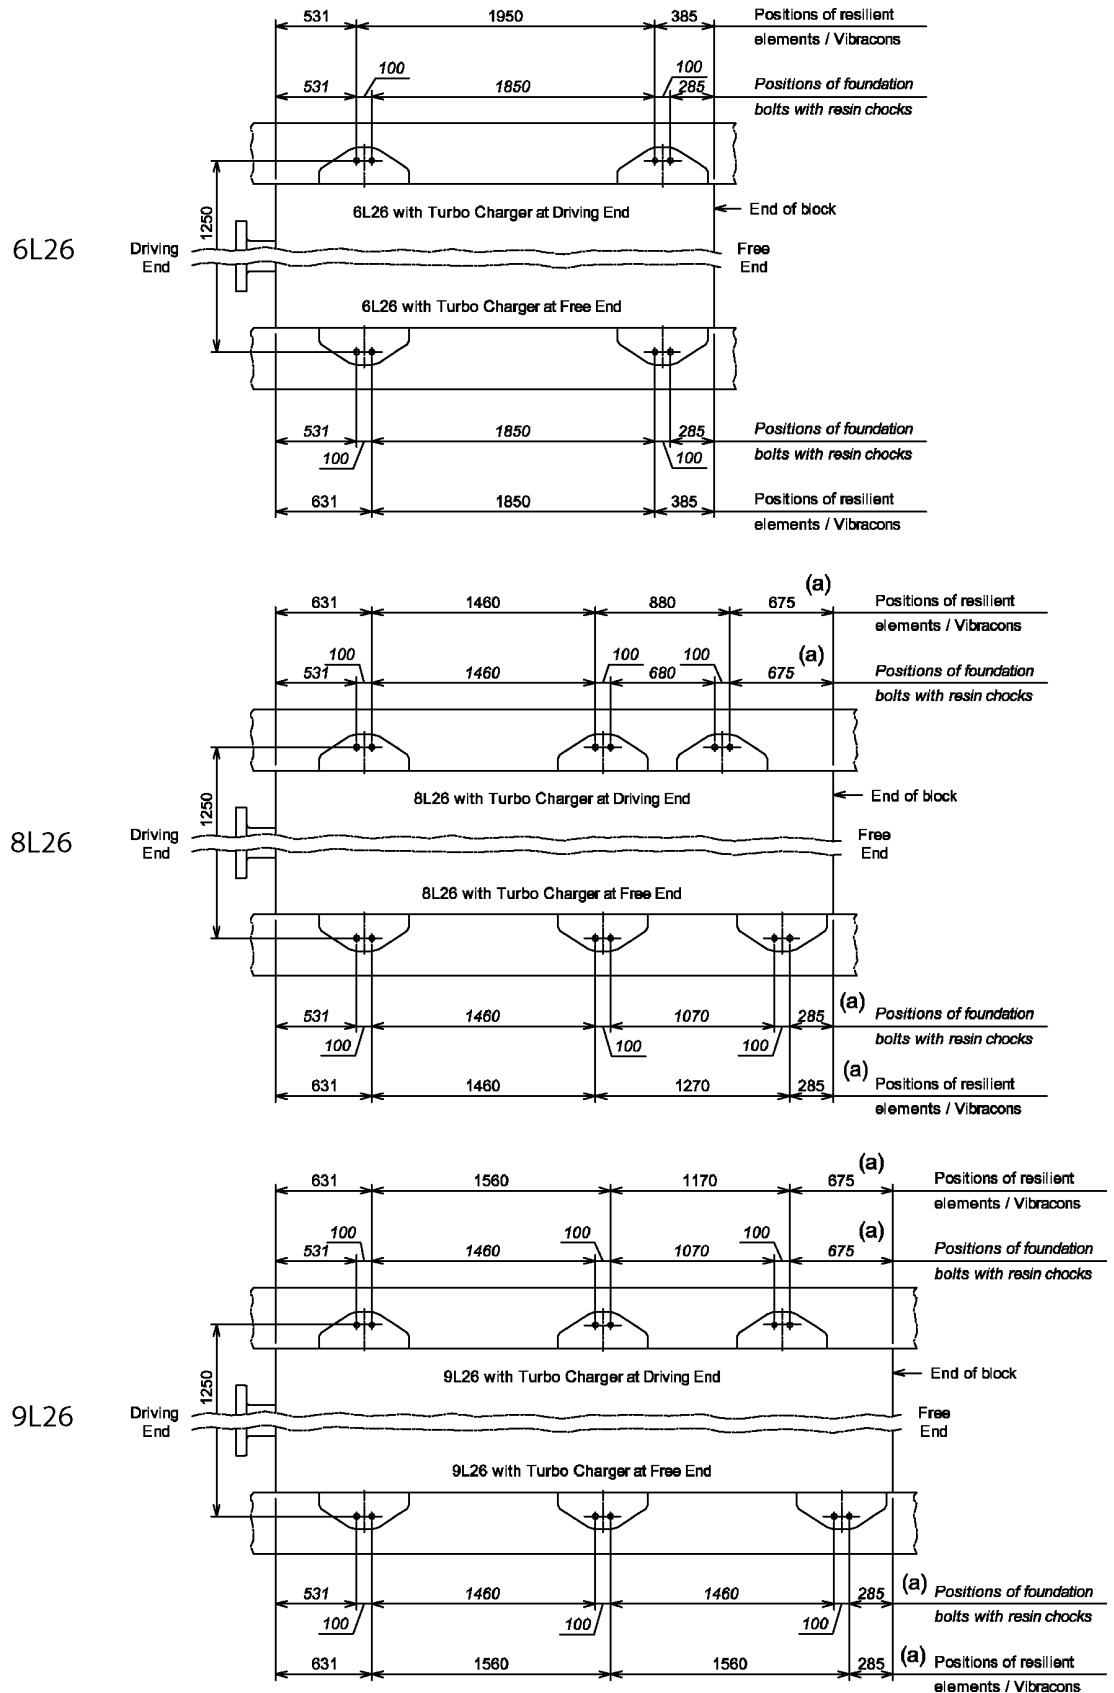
Foundation top-view and drilling plan, in-line engines (9813ZT110a)
